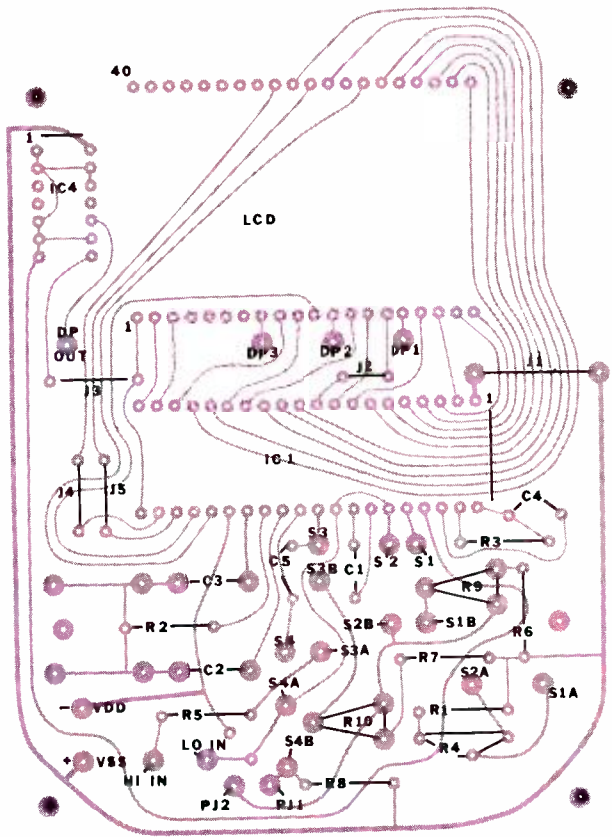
Actual size etching and drilling guide for the pc board for the LCD display meter is shown at right, component placement above.
